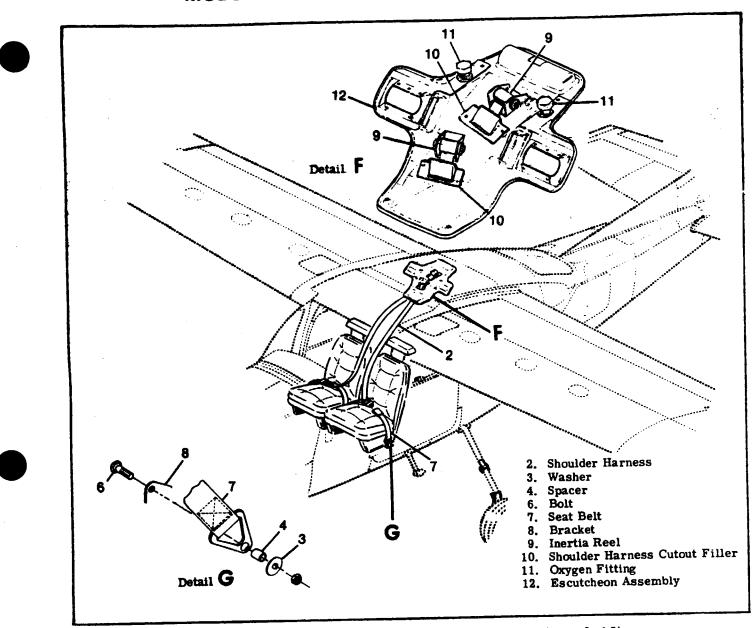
Seat Belt and Shoulder Harness Installation (Sheet 2 of 2).
